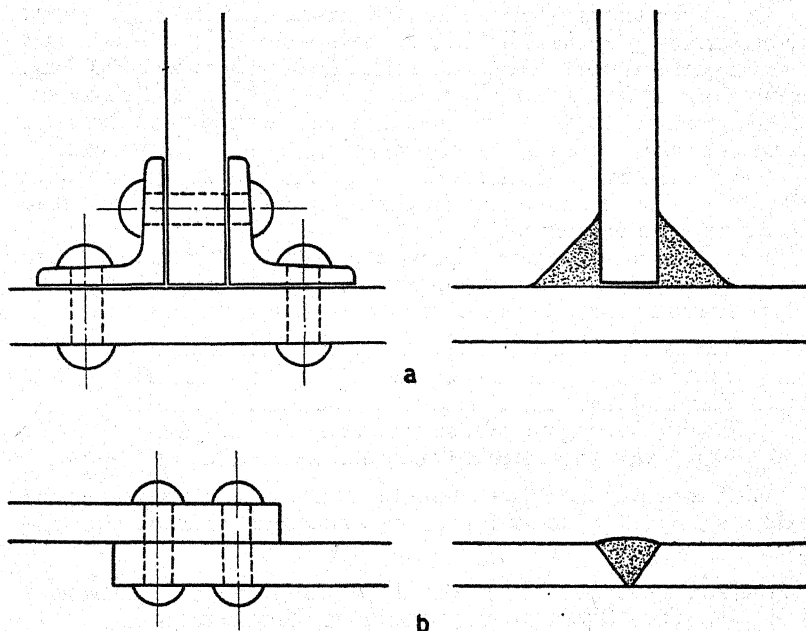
Sketches illustrating the principal advantages of arc welded construction.
